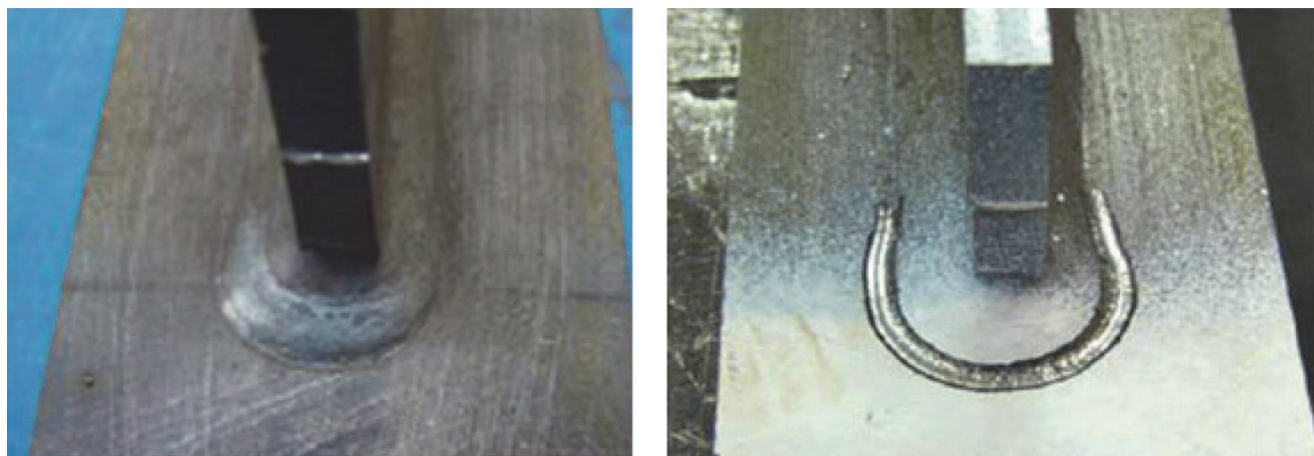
Untreated weld (left) and angle weld after HFMI Treatment (right) [12]
